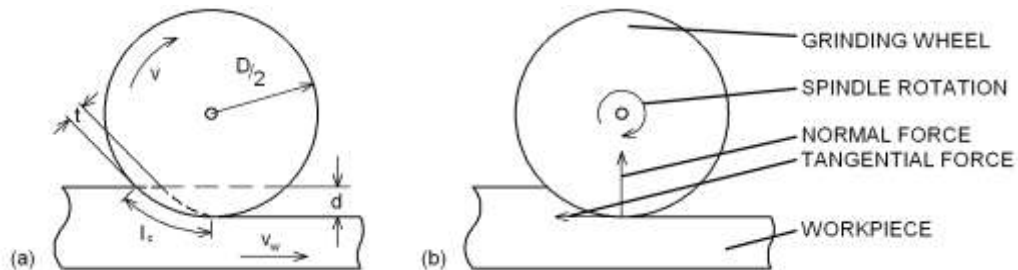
Overview of a grinding setup showing (a) geometric parameters and (b) measurable forces.
